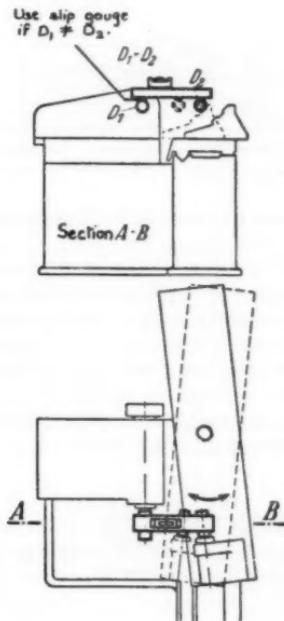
Checking height of main spindle and external grinding spindle. Spirit level method.
